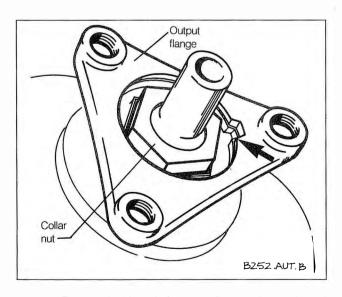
Locking tab for output flange collar nut (arrow). Bend tab out of groove to remove nut.
